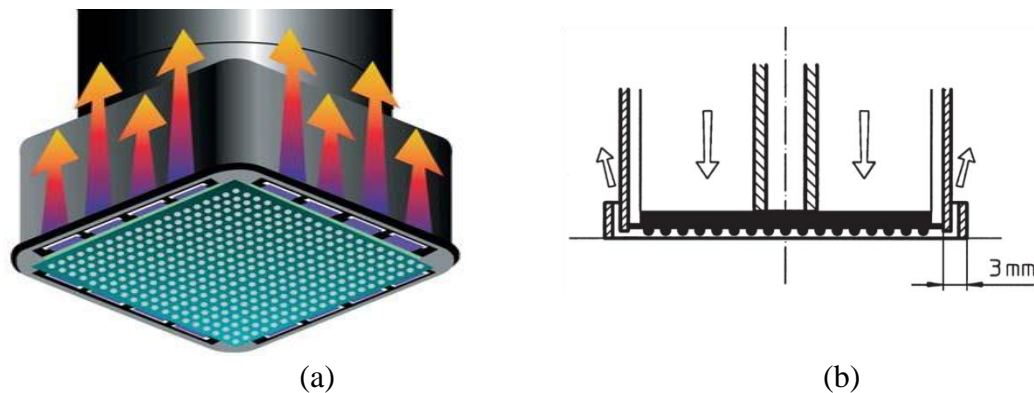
(a) Schematic design of the X gas nozzle; (b) section view of the model
